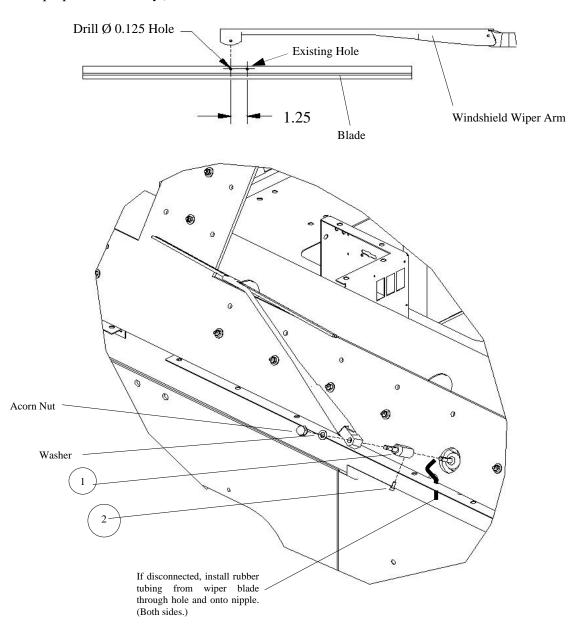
Windshield Wiper Blade Modification and Wiper Arm Installation.
